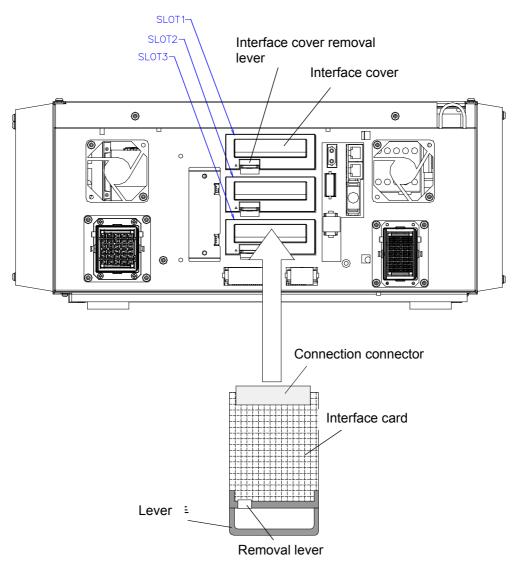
Mounting of the 2D-TZ535 card (CR2D controller)
